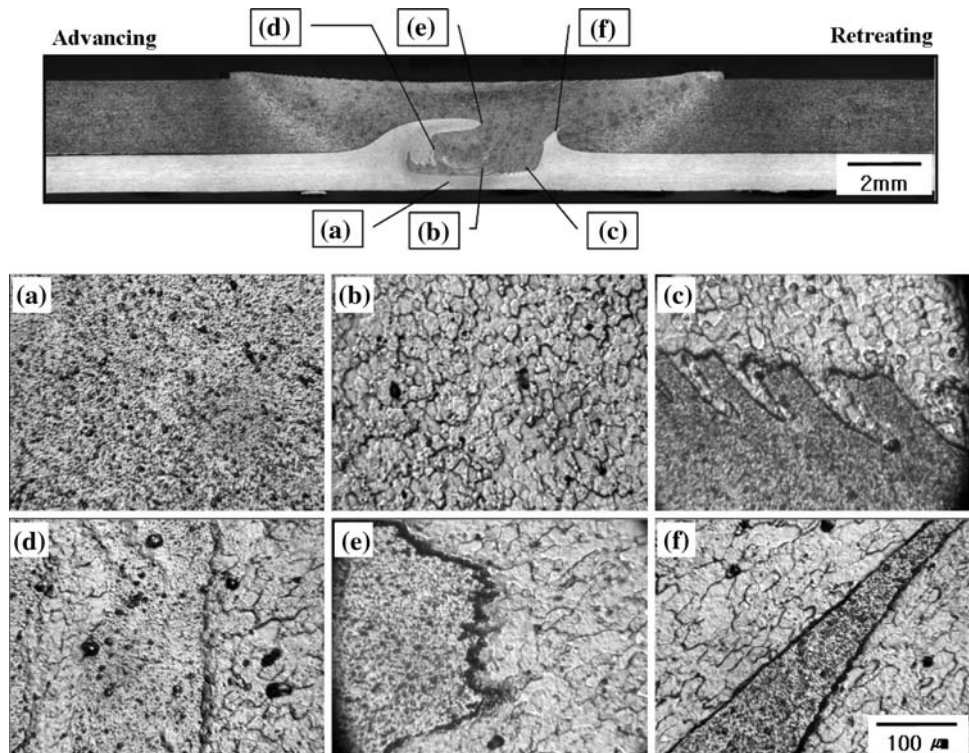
Optical microstructures of the weld zone in case A with the welding condition of 3,600 rpm and 267 mm/min: (a–f) representing each region of the weld zone marked in macroimages
